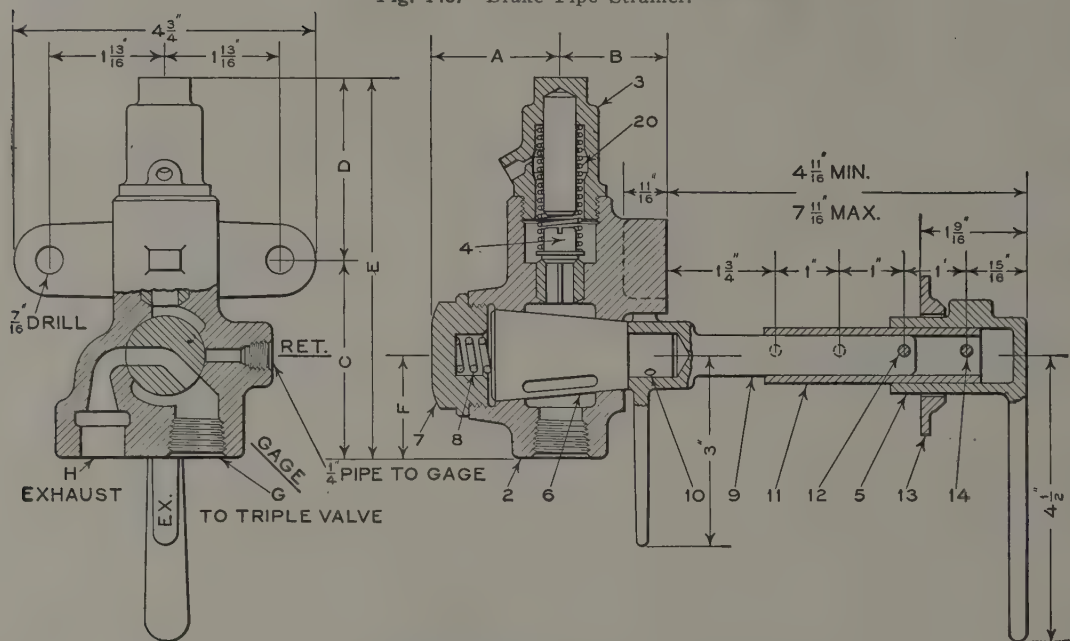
Pressure Retaining Valve for Passenger Cars, Spring Type. New York Air Brake Company.
